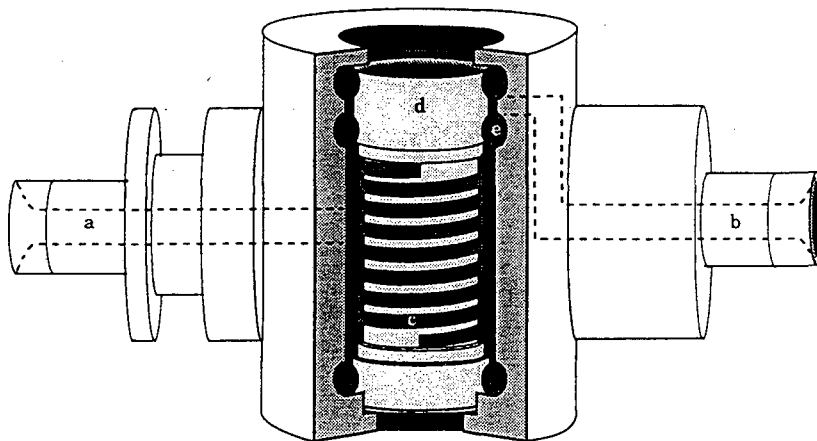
Cutaway view of the stator housing. (a) Bearing air channel (dotted hidden lines). (b) Drive air channel (dotted hidden lines). (c) rf coil, in bearing air cavity. (d) Stator. (e) O-rings separating bearing and drive air supplies.
